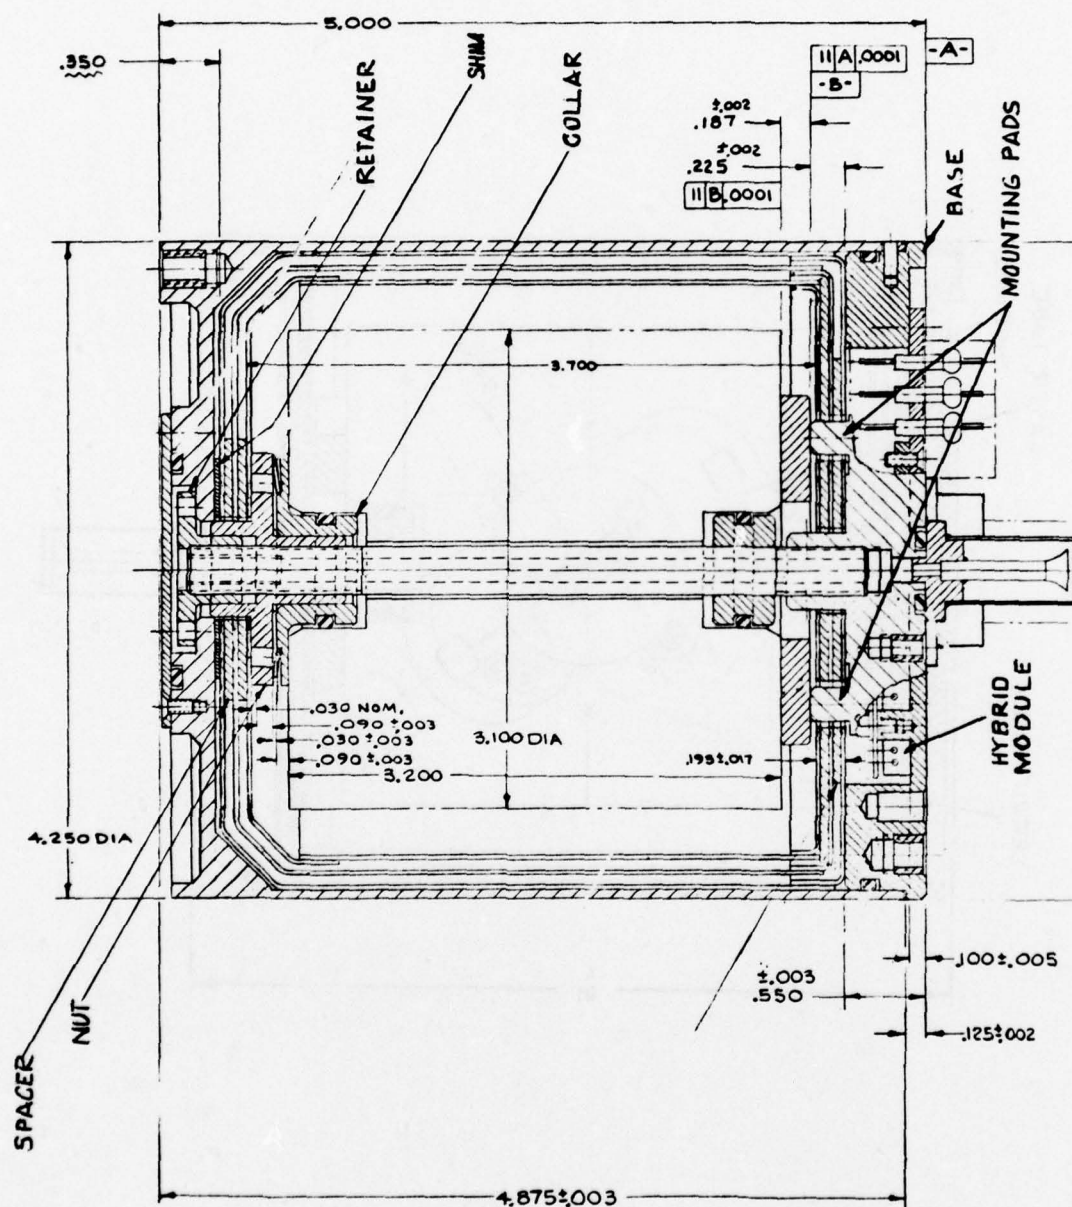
Cross-section of SLIC 7/2 Platform Showing Mounting Pads of Base
